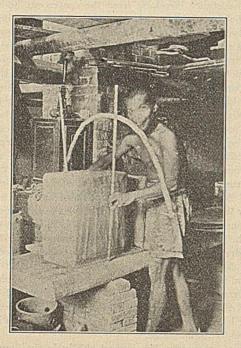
CUTTING SLICES OF CLAY FOR USE IN THE MOLDS
